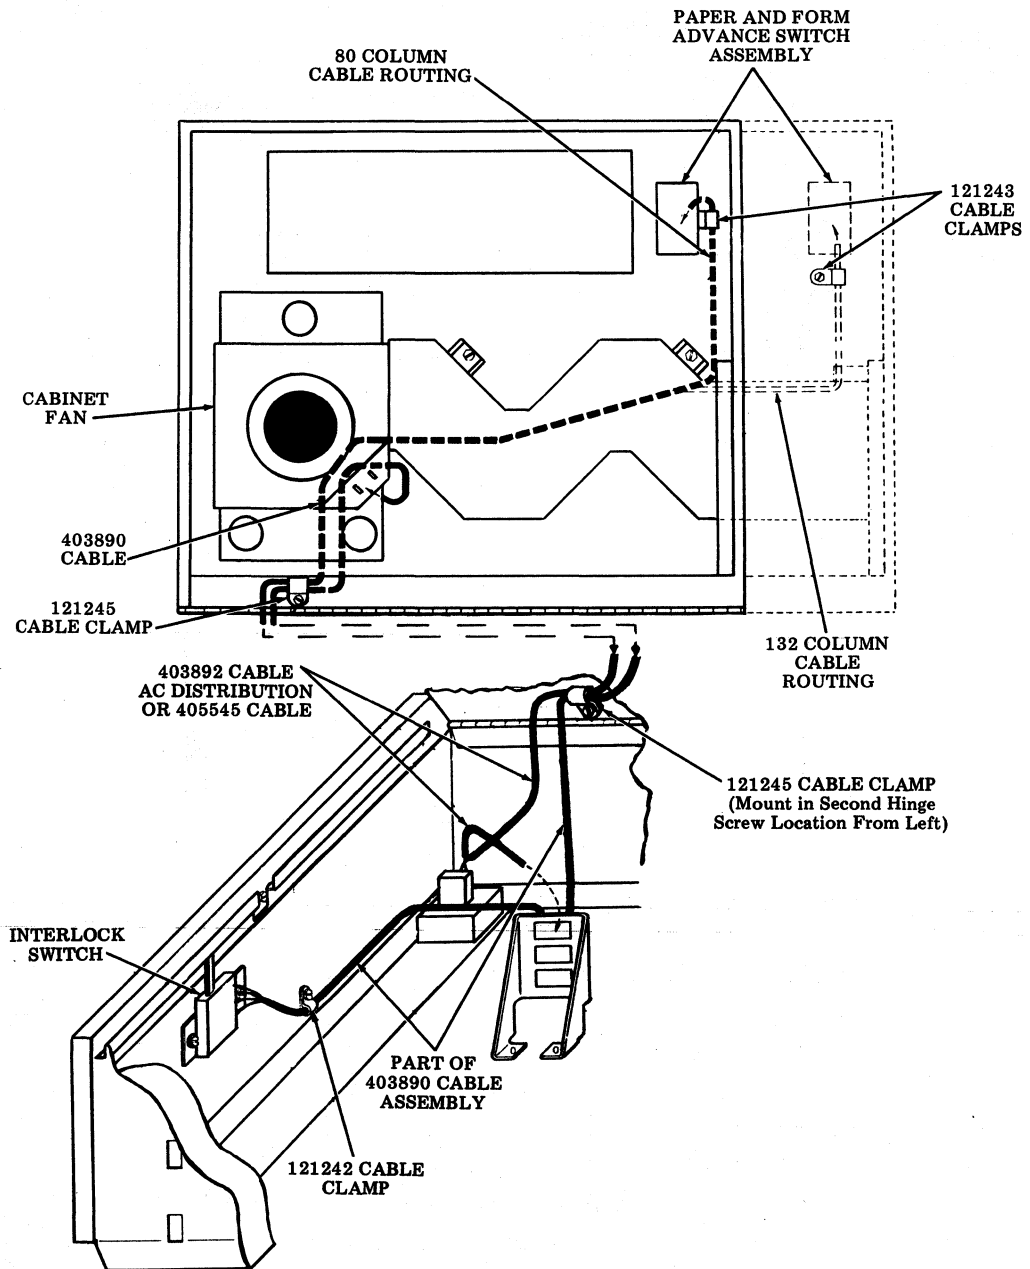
40CAB351 and 40CAB353 Tractor Feed Cabinet Basic Cabling
